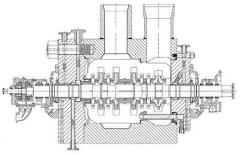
Between bearings, multistage, radially split, double casing, volute type pump with opposing impellers.
